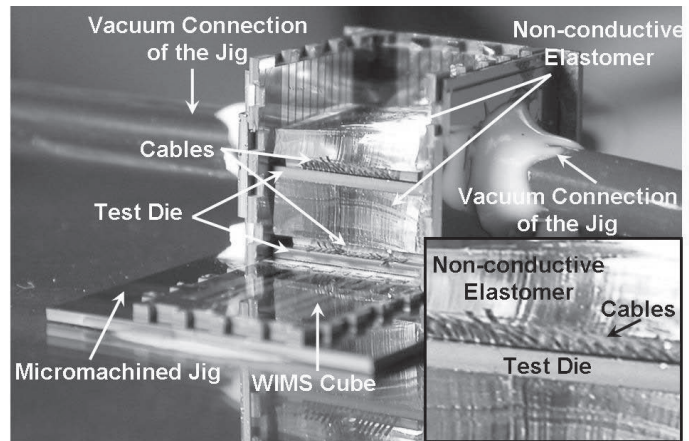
A WIMS Cube with passive cables during testing. The platform is a permanently assembled jig. The Cube is dropped into the jig using a flat platform not shown in the picture.
